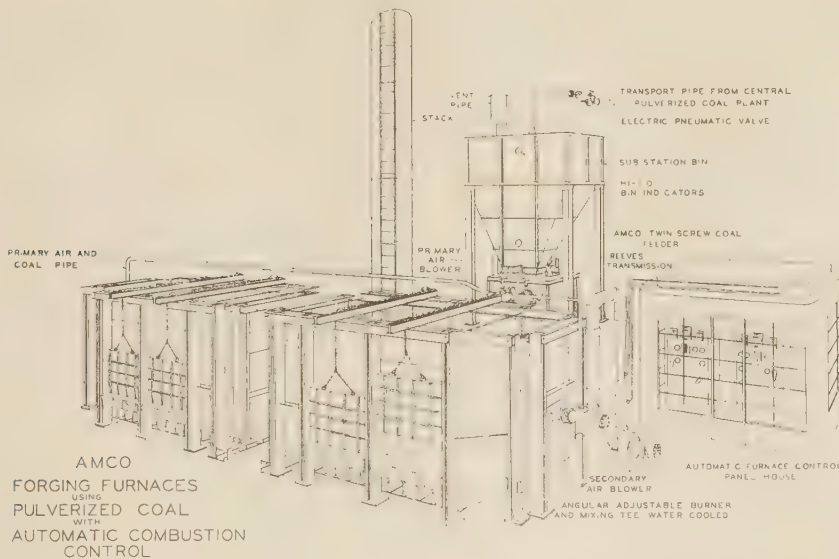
FORGING FURNACES USING PULVERIZED COAL WITH AUTOMATIC COMBUSTION CONTROL
